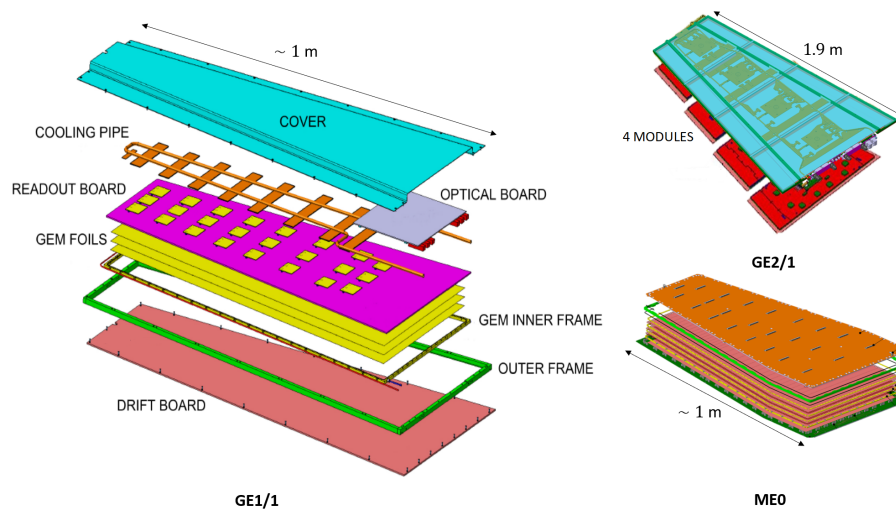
Exploded view of the three types of detectors. Taken and modified from [28, 6].
